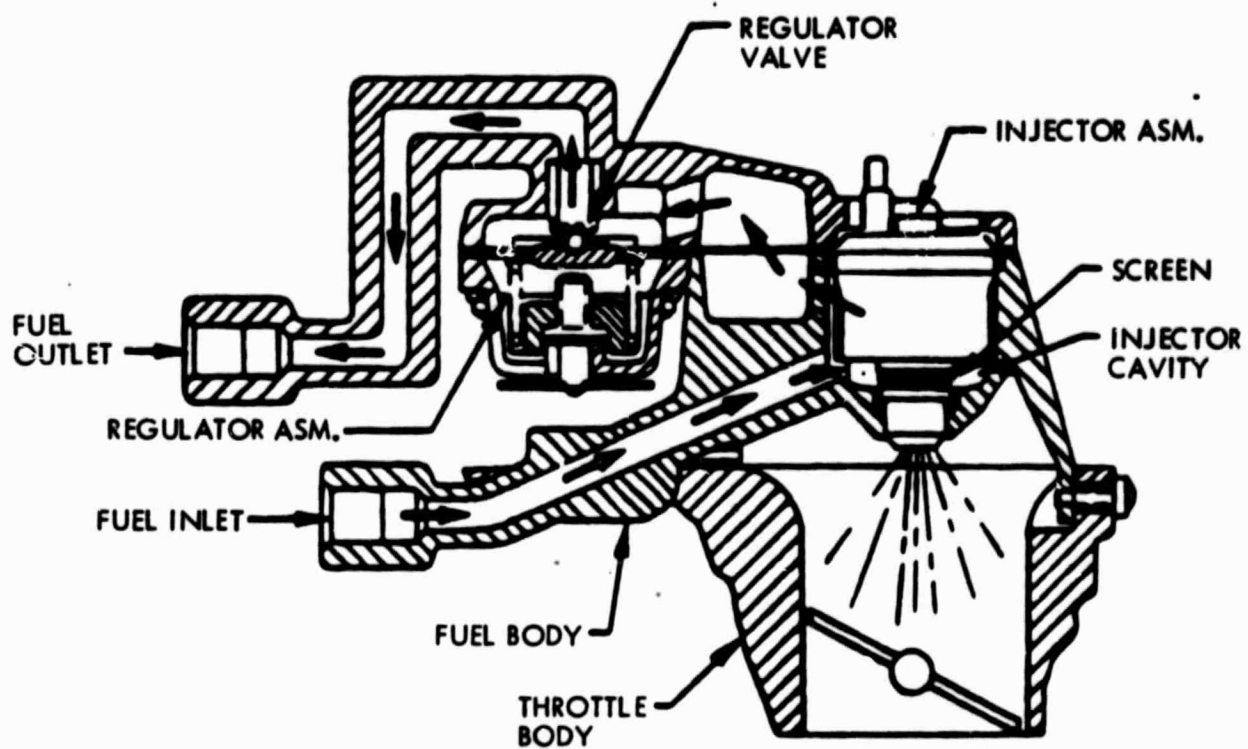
Fuel Body Assembly Showing Fuel Flow Path, Injector Mounting and Pressure Regulator (Ref. 20)
